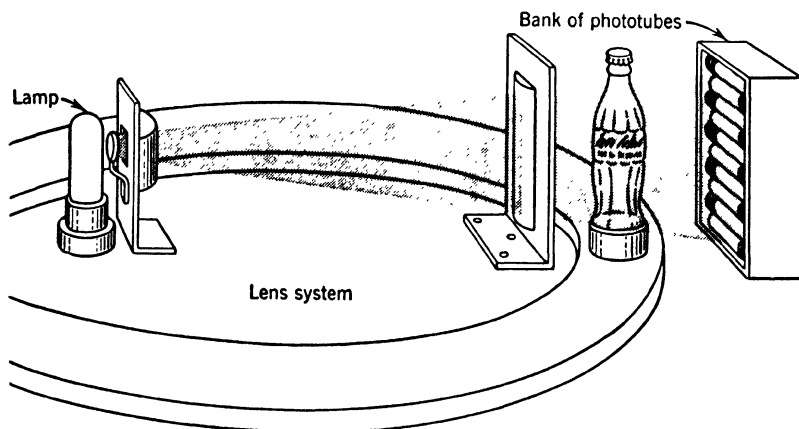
Machine for Inspecting Bottled Beverages for Foreign Particles. (Reference 34.) (Courtesy of *Machine Design*.)
